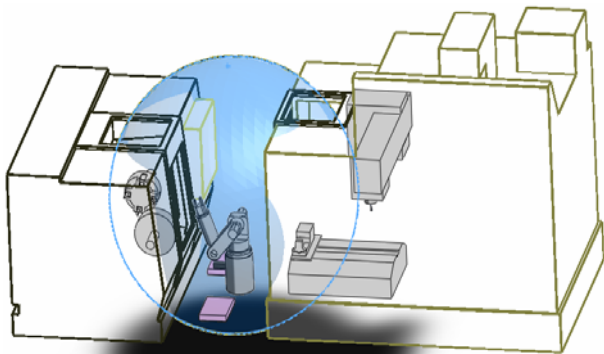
Milling and lathe machine are reachable with the robot arm together with given storage boxes
